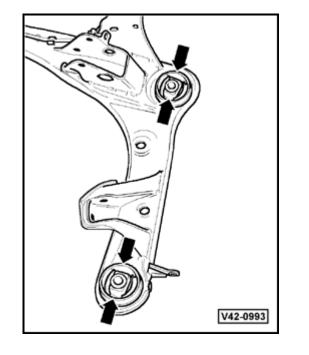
Installation positions of bonded rubber bushings in rear subframe
